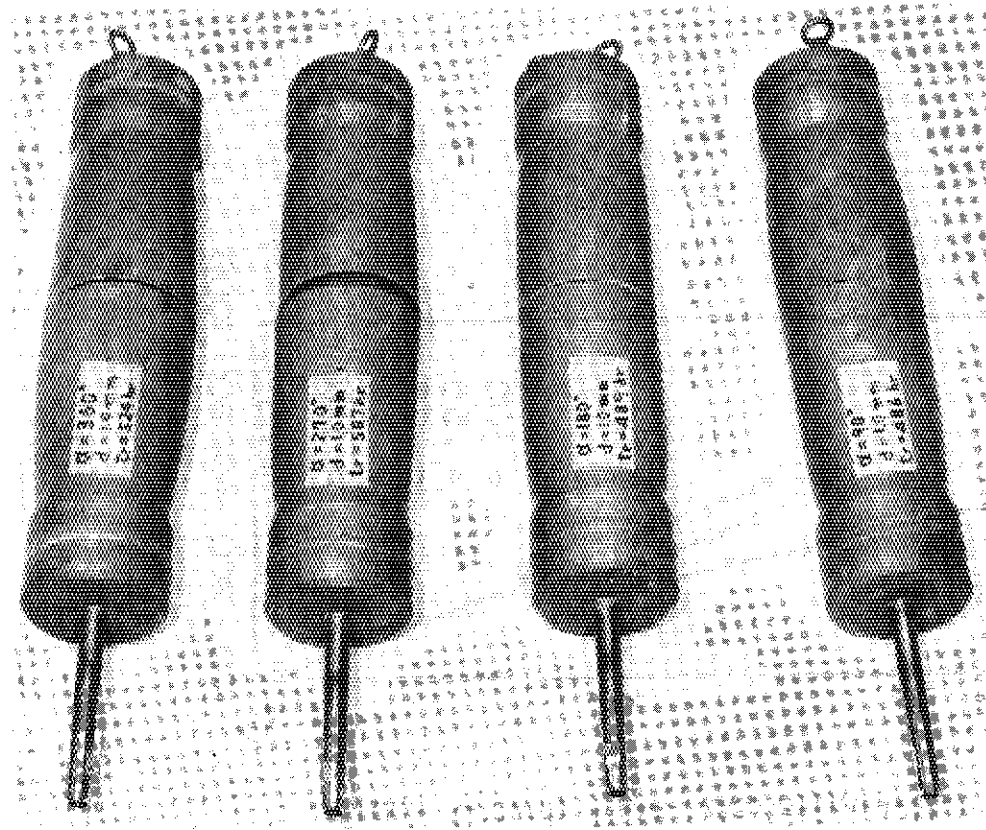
Fracture Appearance of Tubes Containing circumferential Notch
